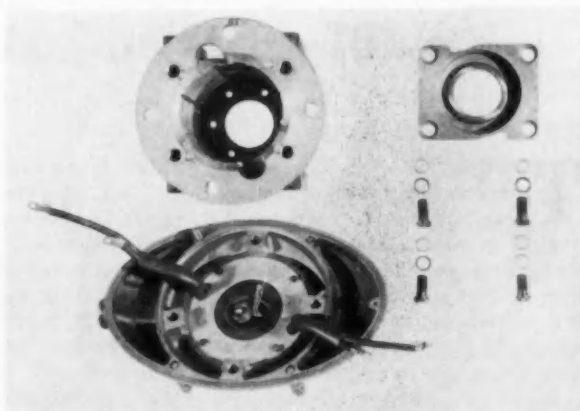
Redesign DLN-9 magneto top bearing support for R-3350 engine. Complete kit includes reworked parts (left) and new parts (right).
